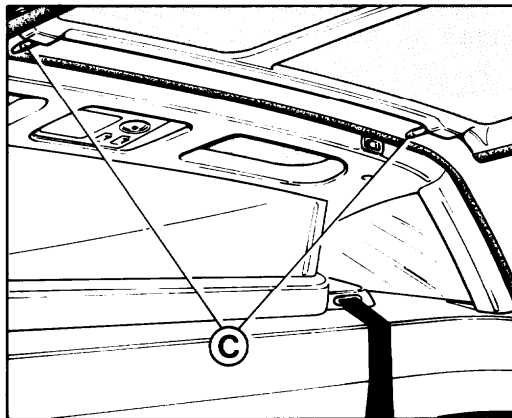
26 - 27 - Hardtop (removal and mounting)
